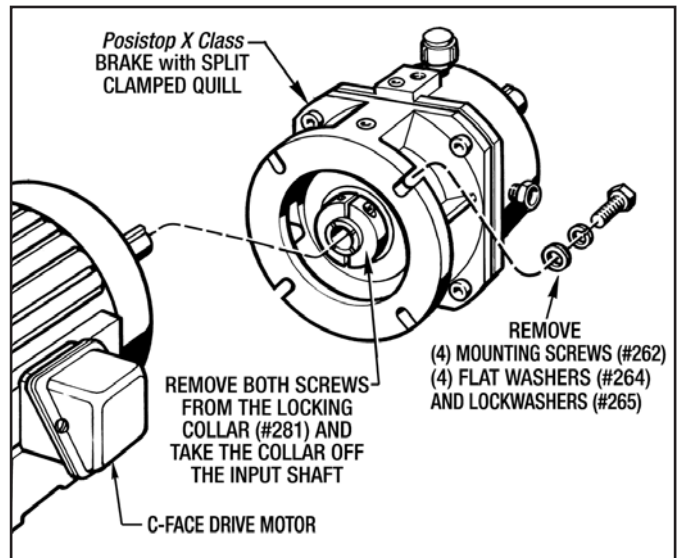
Removing XB1, XB2, XB3 & XB4 Coupler or Motor Brake From The Drive Motor
